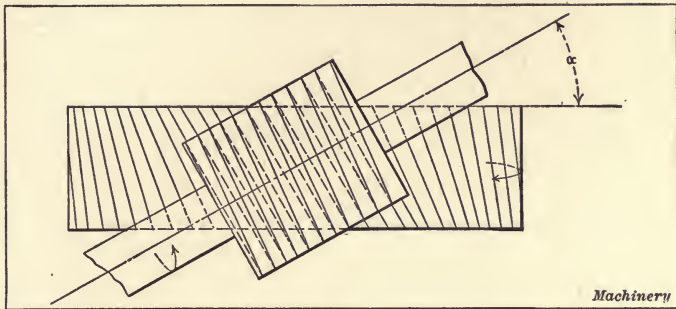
Cutting a Left-hand Spiral Gear with a Left-hand Hob
